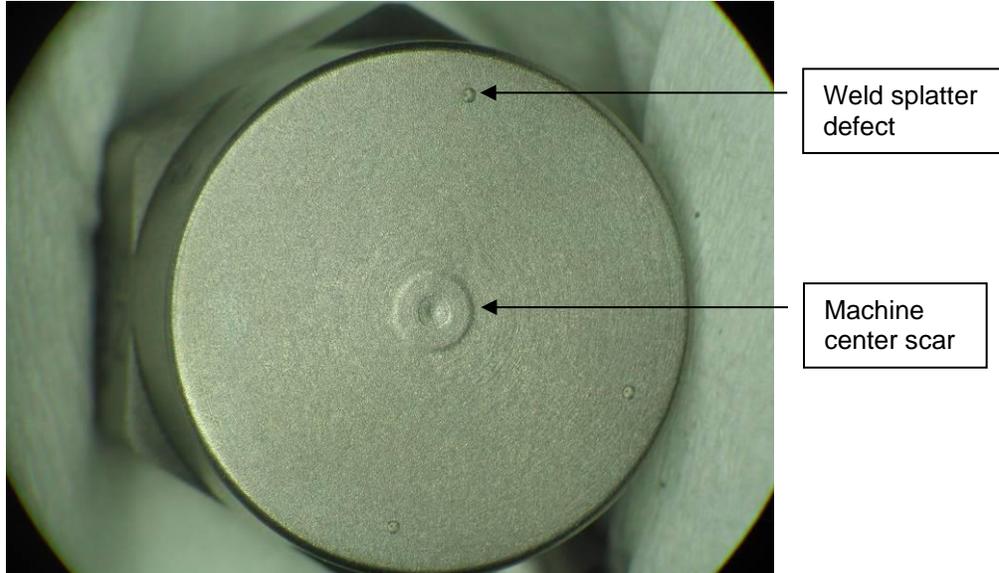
Unacceptable Machining Scar and Weld Spatter Example
